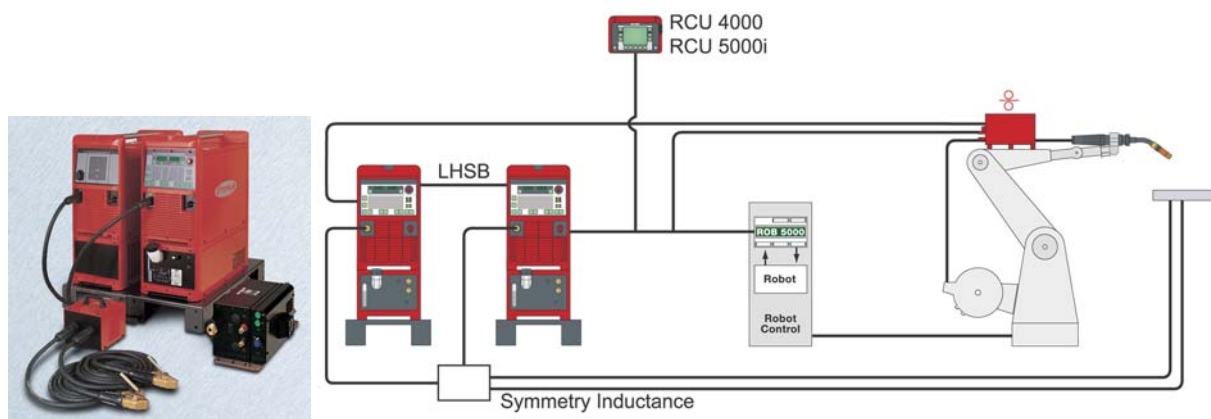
High-performance power supply TPS 9000 which delivers a welding current up to 900 A.
